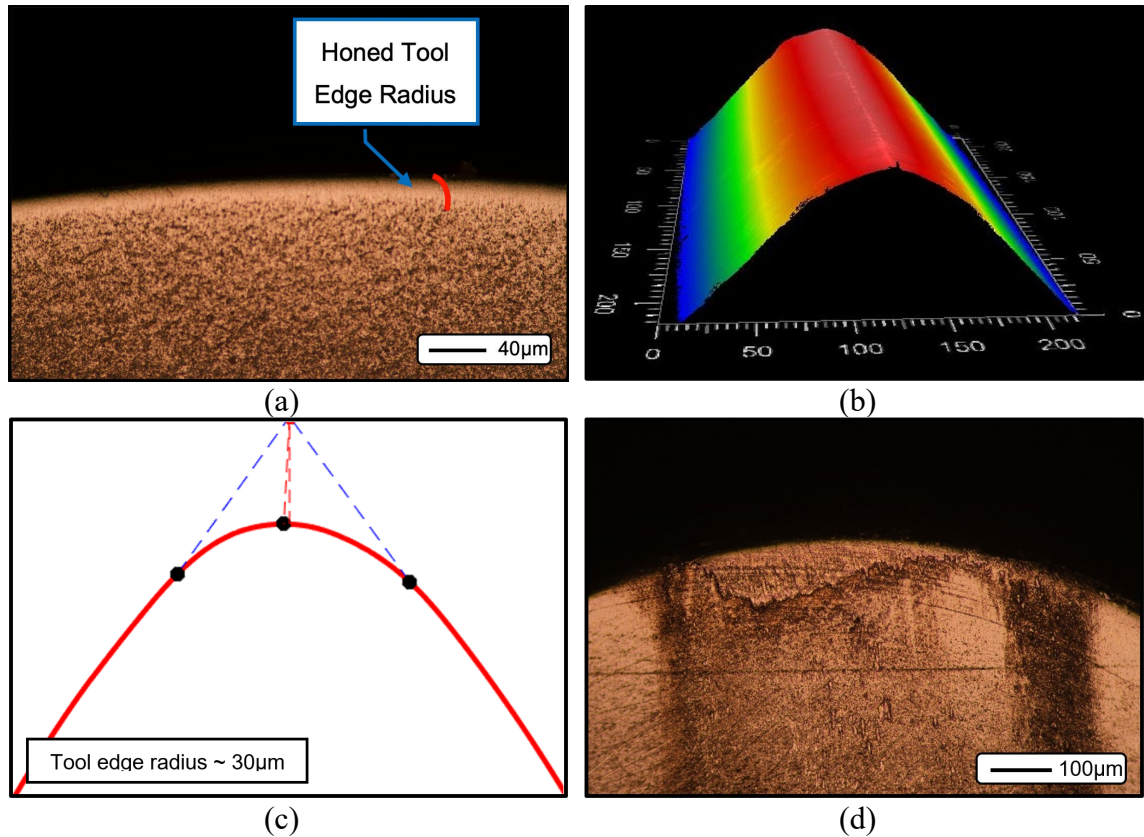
(a) Rake face view of modified edge of a Kennametal TPGN K-68 tool of $r_c = 3.2$ mm, $r_e = 30$ μm ; (b); Tool cloudmap produced via scanning white light interferometer; (c) Subsequent analysis of tool cloudmap via MATLAB; (d) Used tool exhibiting tool/workpiece contact discoloration and limited adhesion, but no tool- (edge- or nose-) wear. Adapted from author's published work with permission from MDPI [16].
